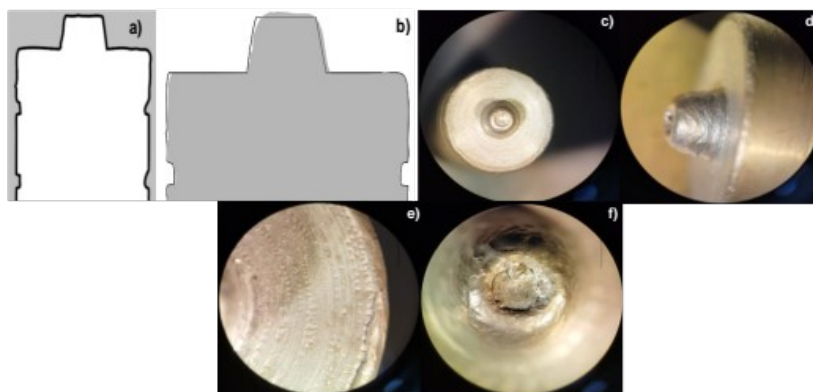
H13 steel tool tested at a rotational speed of 1120 rpm. a) Tool profile before the wear test. b) Worn tool profile overlaid with the reference tool profile. c) Worn contact surface observed under a stereoscope at 1X magnification. d) Worn tool pin, side view, observed under a stereoscope at 3X magnification. e) Worn tool shoulder observed under a stereoscope at 3X magnification. f) Worn tool pin, top view, observed under a stereoscope at 3X magnification.
